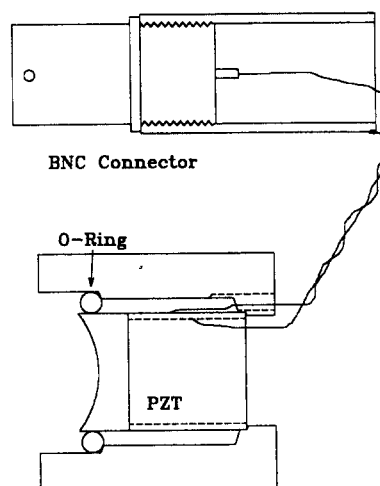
Mechanical mounting details for the Fabry-Perot mirror and PZT. The mirror and PZT tube are mounted inside a 1-in.-diam aluminum housing, which can itself be mounted in a larger (1-in. i.d.) tube or any standard 1-in. mirror mount. The $\frac{1}{2}$ -in. copper tube containing the BNC connector can be mounted in a right-angle post-clamp for strain relief.
